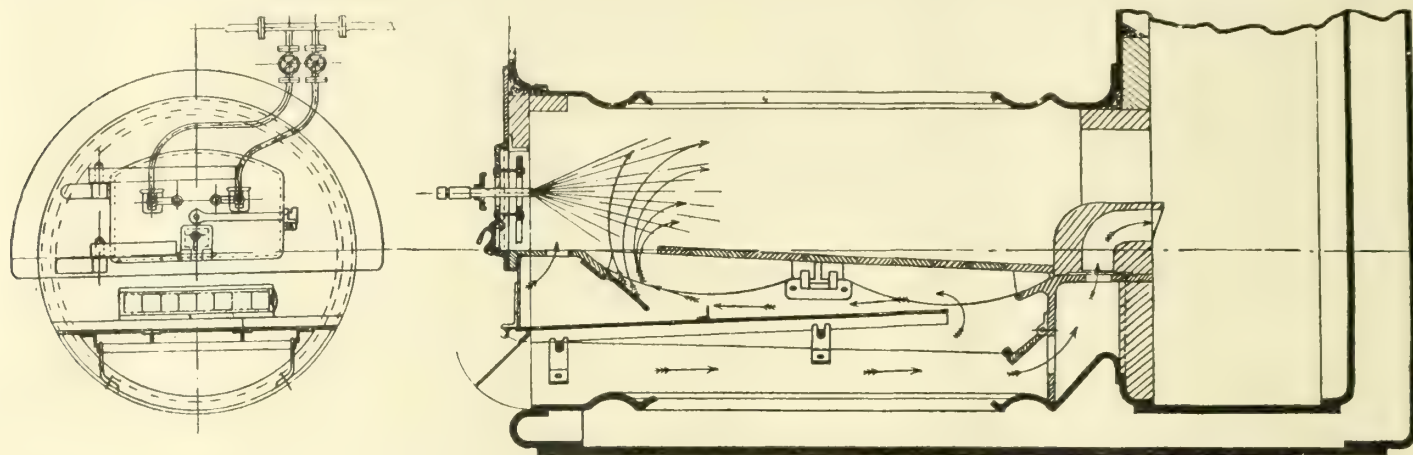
FURNACE ARRANGEMENT FOR BURNING LIQUID FUEL AND COAL.
